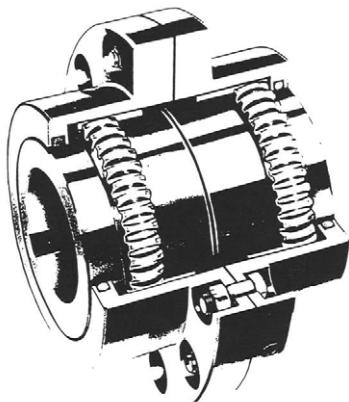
Gear tooth coupling (grease packed) (Courtesy of Zurn Industries)
